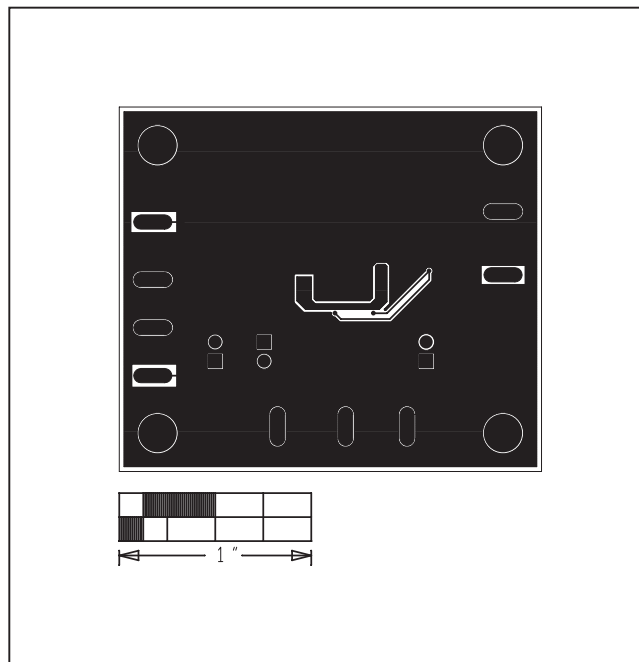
MAX17552 5V EV Kit (μMAX) PCB Layout—Solder Side
